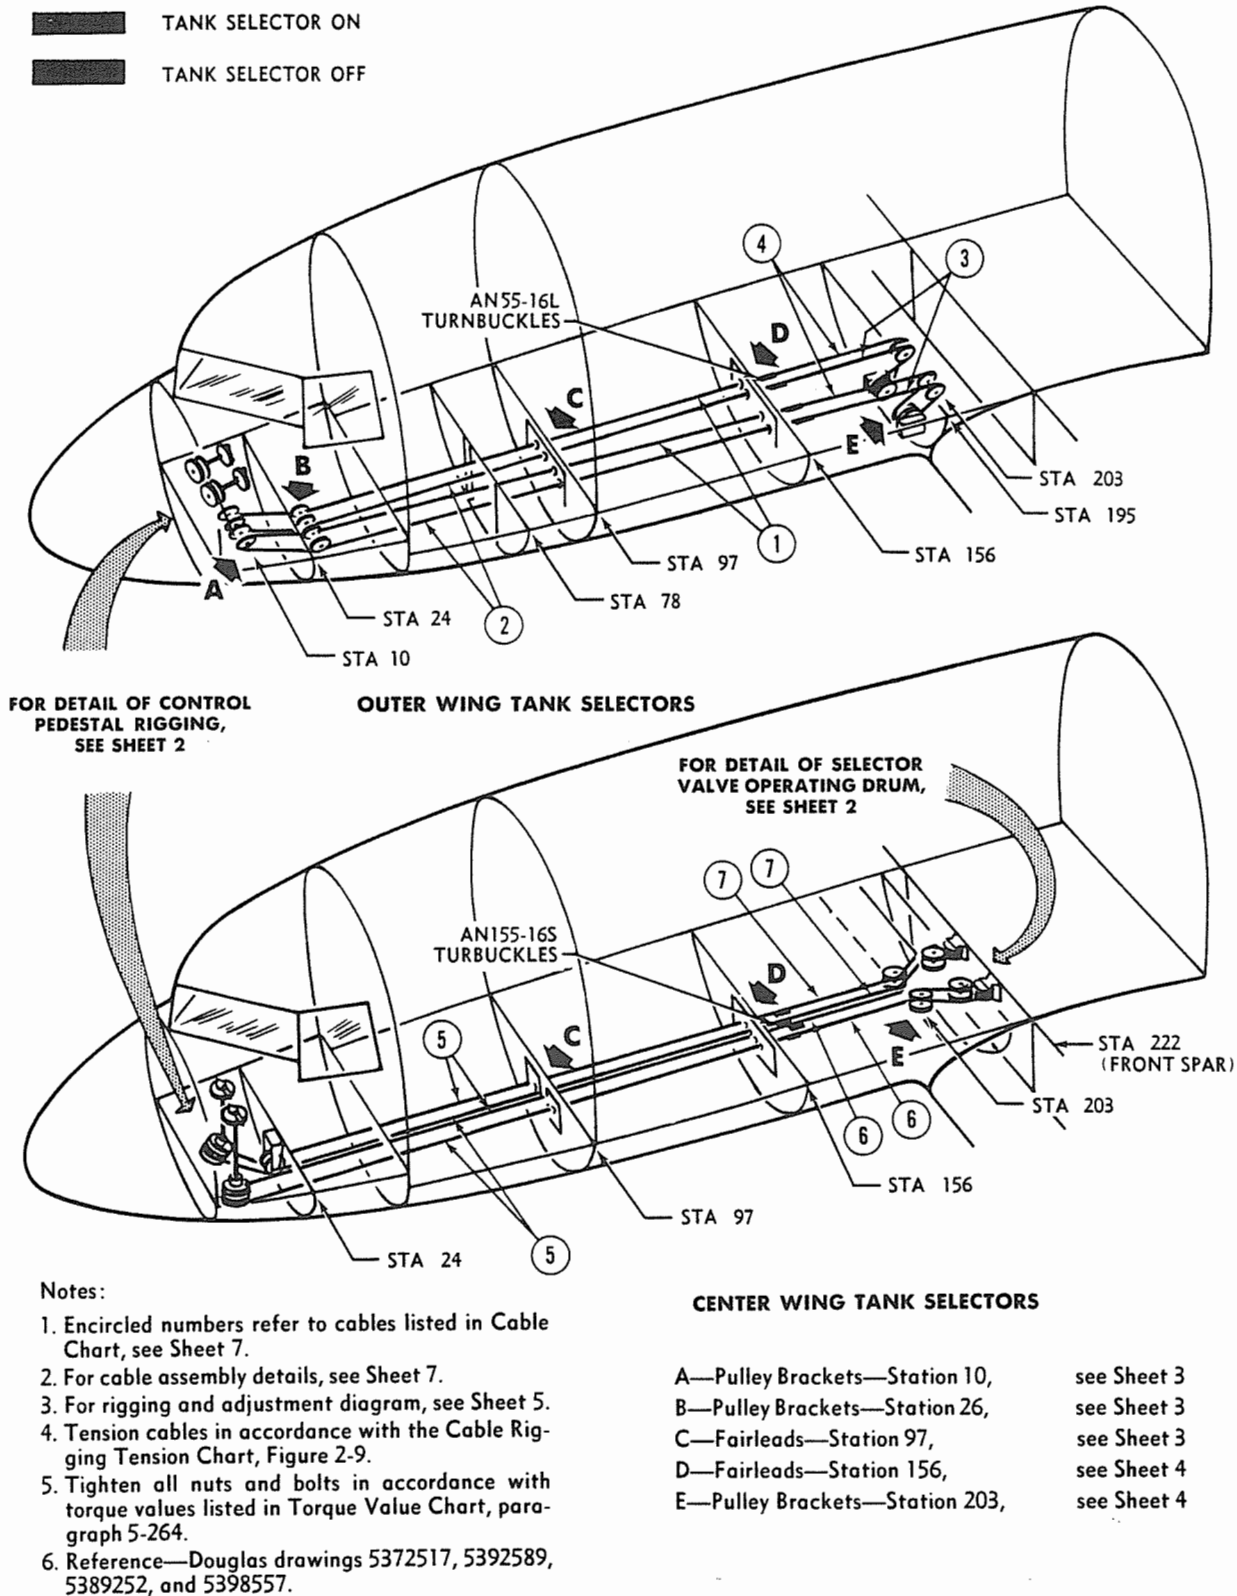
(Sheet 1 of 7 Sheets). Fuel Tank Selector Valve Control System — Key Drawing
